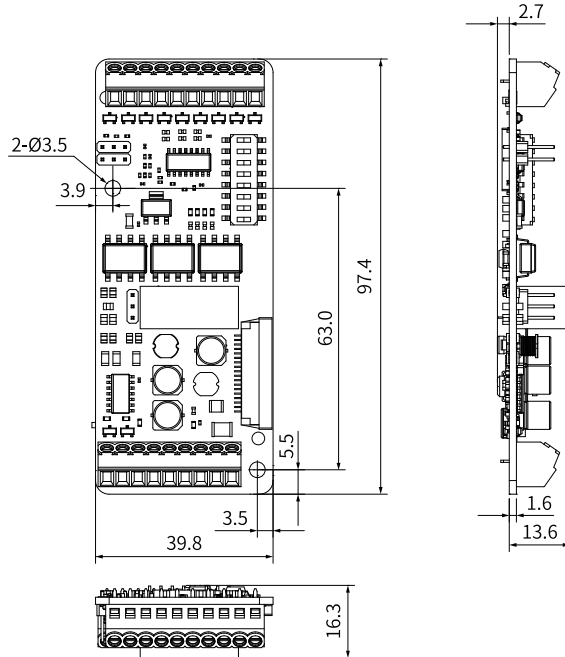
MD38PGMD card dimensions (unit: mm)
